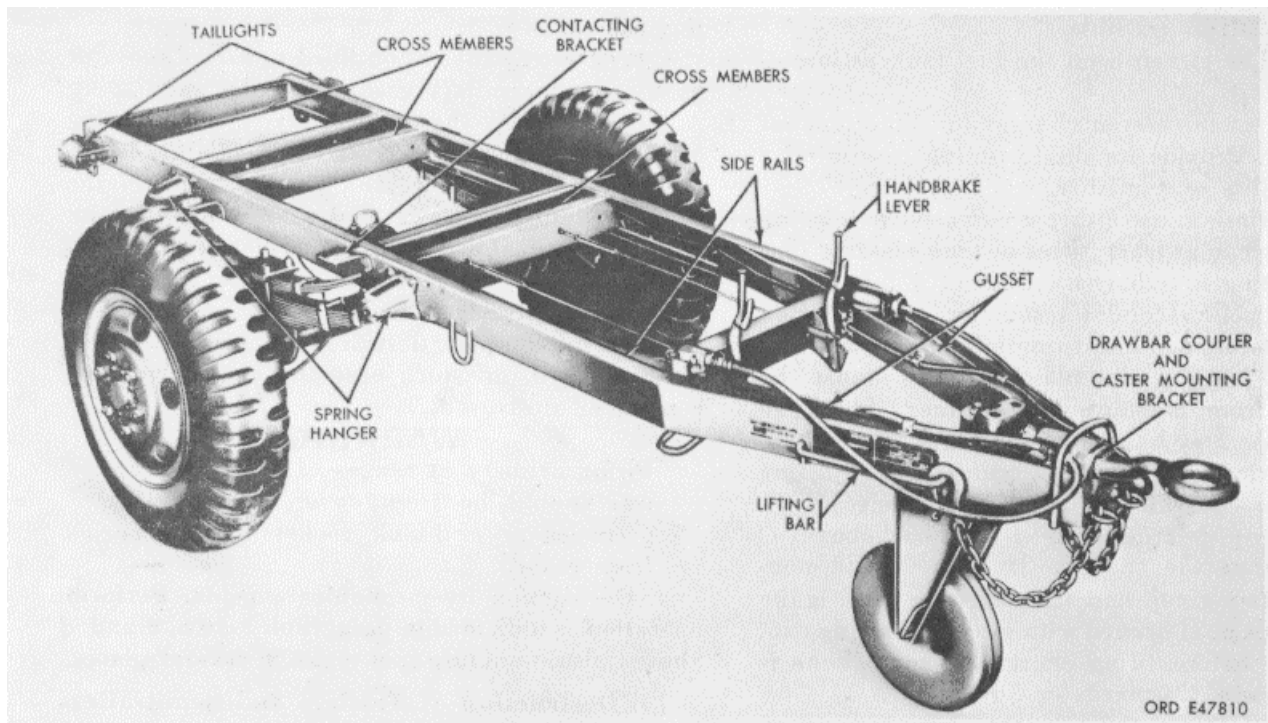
1 1/2-ton, 2-wheel, trailer chassis
